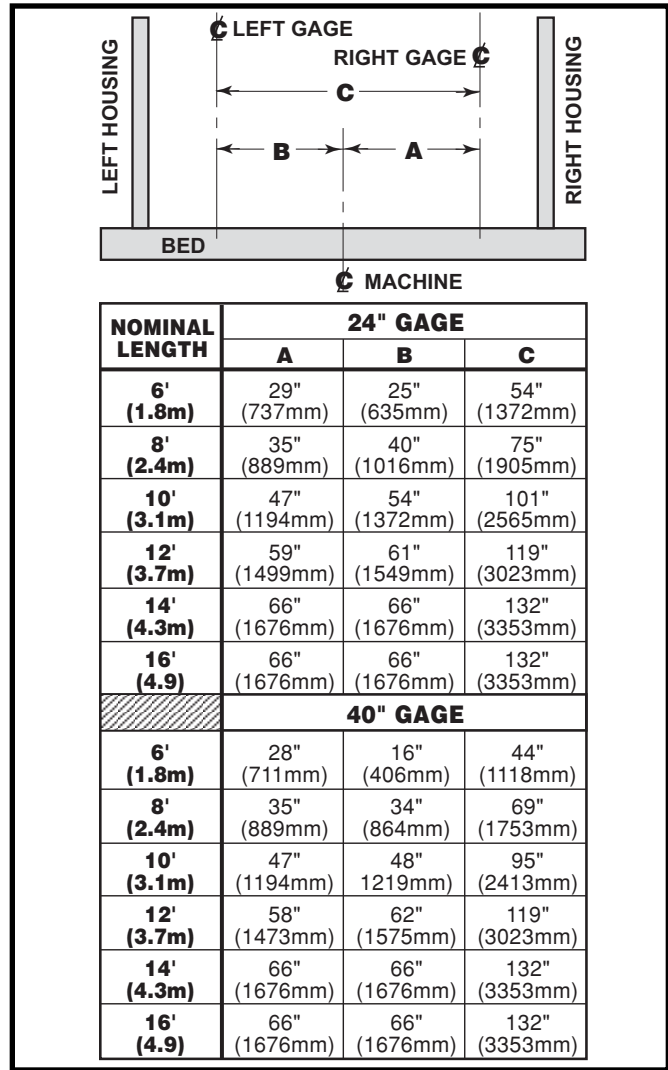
CNC Heavy Duty Backgage drive assembly positions
